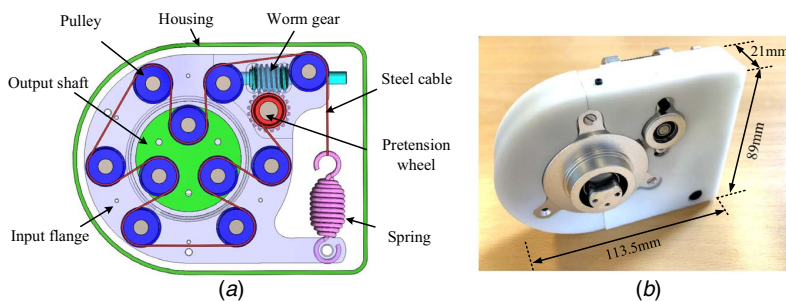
An embodiment of VSM: (a) CAD model and (b) prototype
